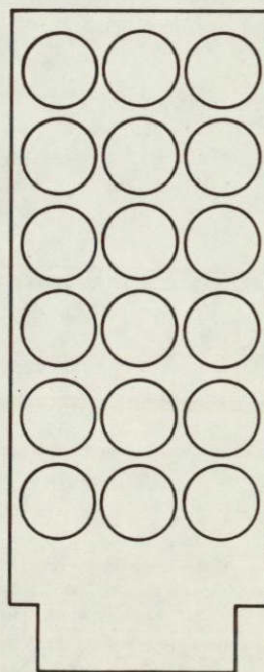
THREE-BY-SIX SENSOR ARRANGEMENT ON INSIDE SURFACES OF JAWS (FULL SIZE)
